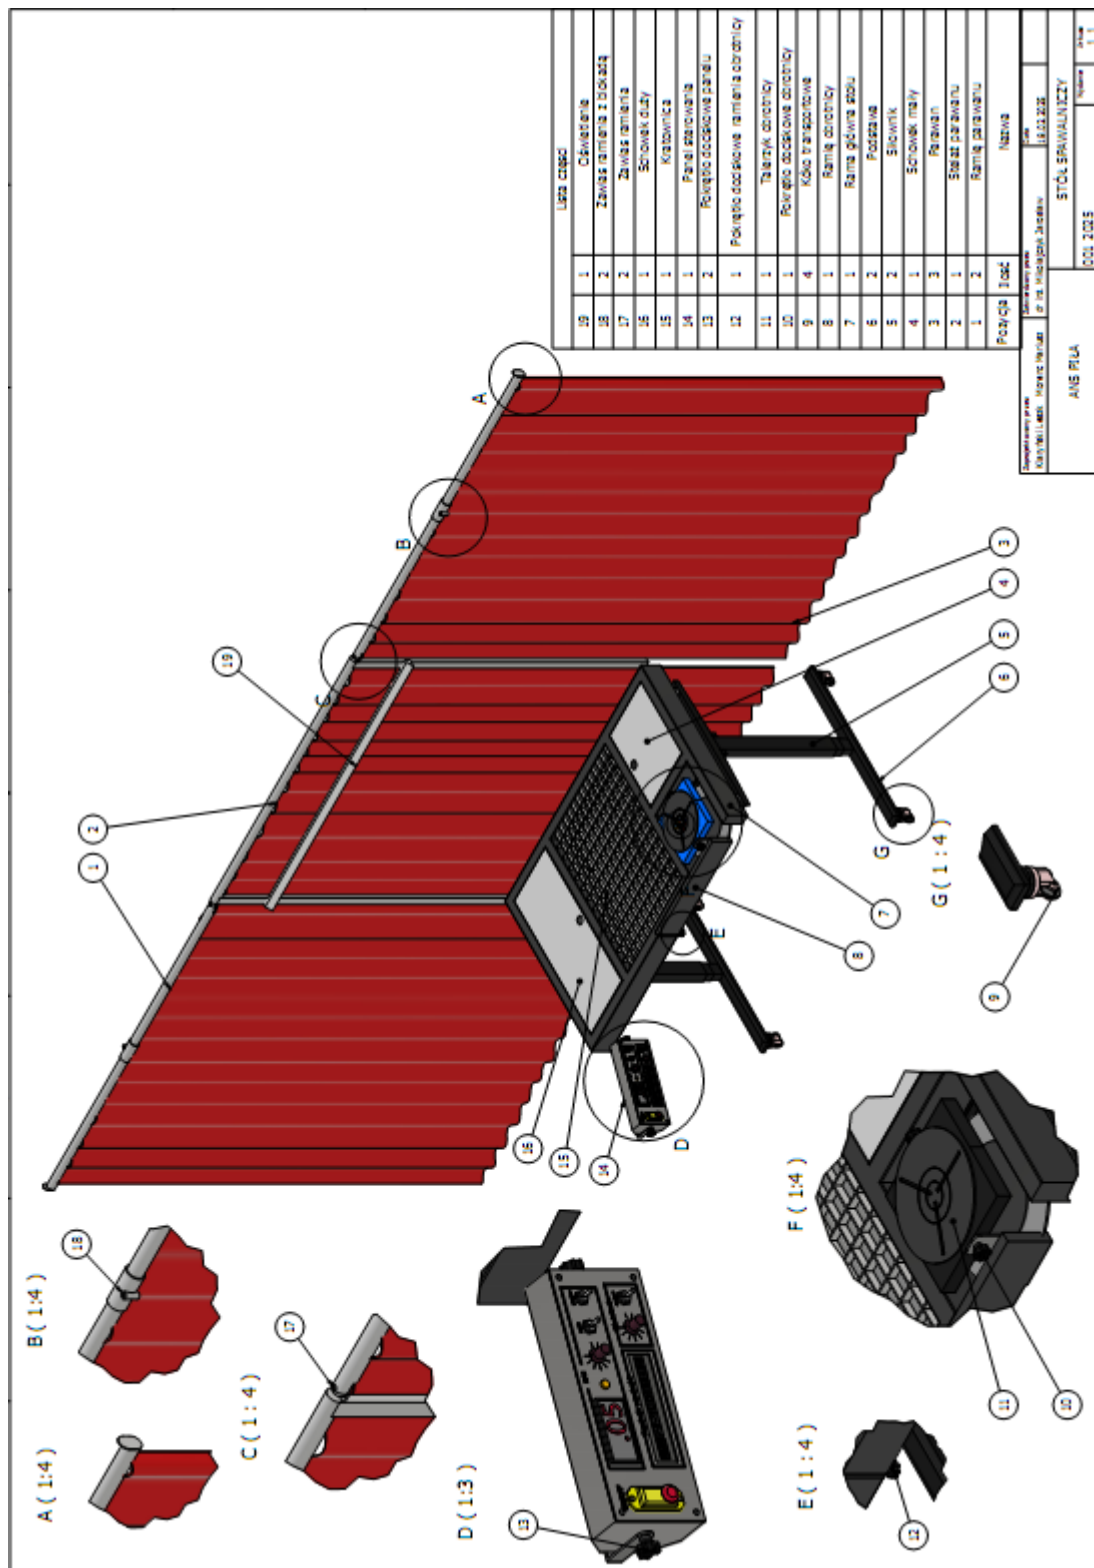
Assembly drawing of the designed and constructed welding table
